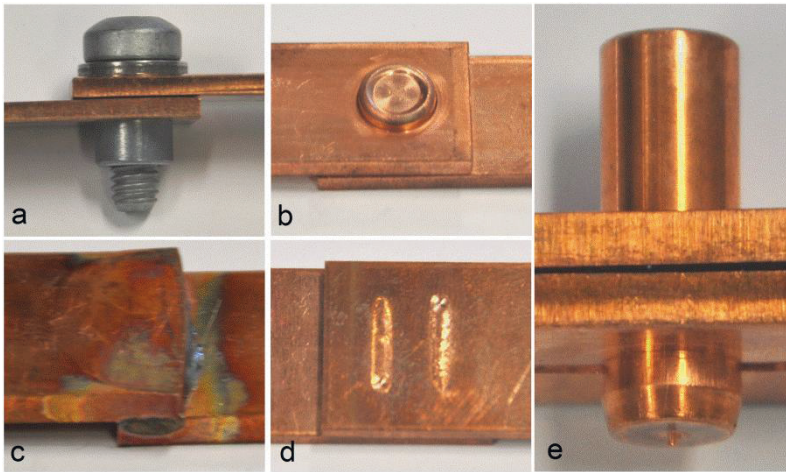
Overview of joining technologies for high power contacts: a) assembling, b) joining by metal forming, c) brazing/ soldering, d) (laser) welding, e) cold-joining.
